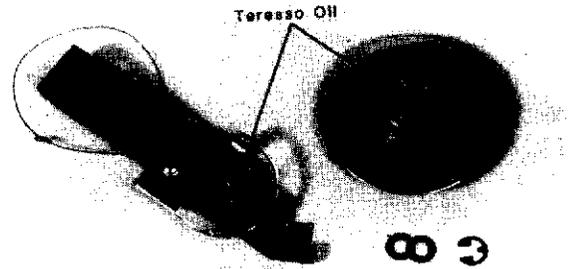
CLEAN and SERVICE CLUTCH ARM
